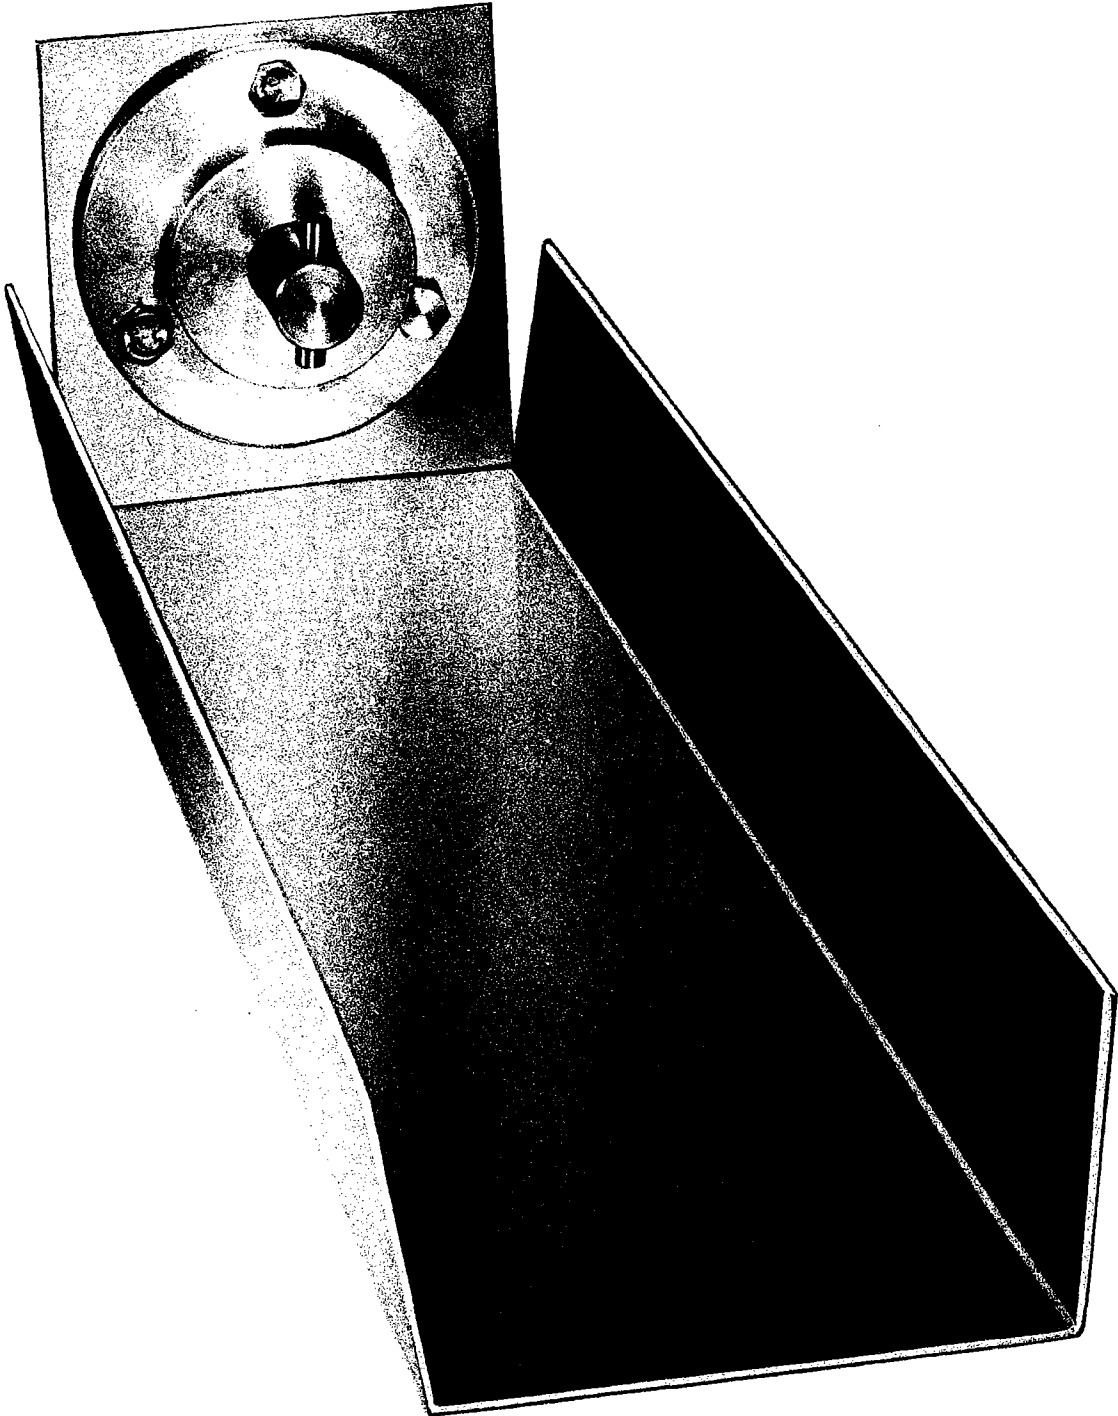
AUGER ICE CHUTE & UPPER BEARING ASSEMBLY.
